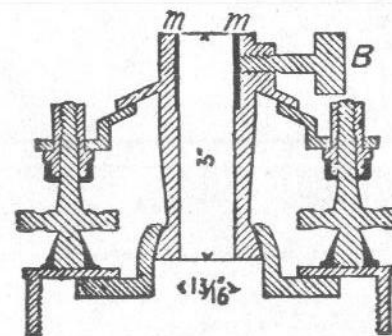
ENLARGED SECTION THROUGH TRIPOD HEAD.
